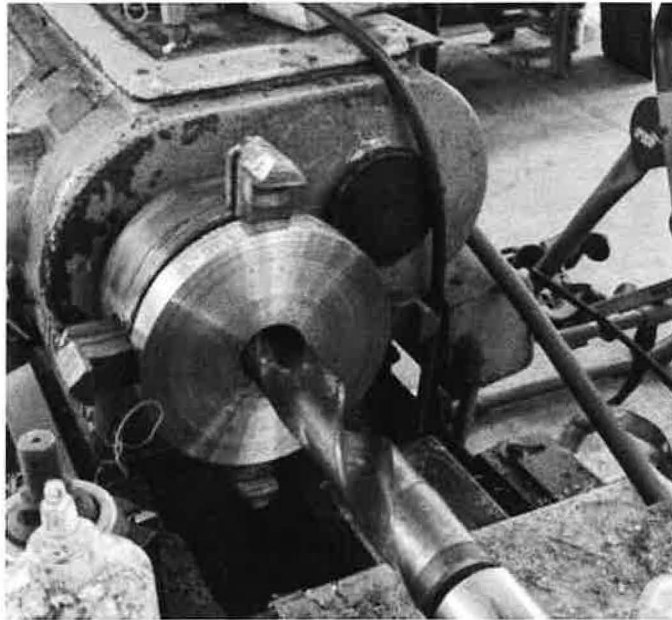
Fabricating a heavy-duty stainless nozzle plate
